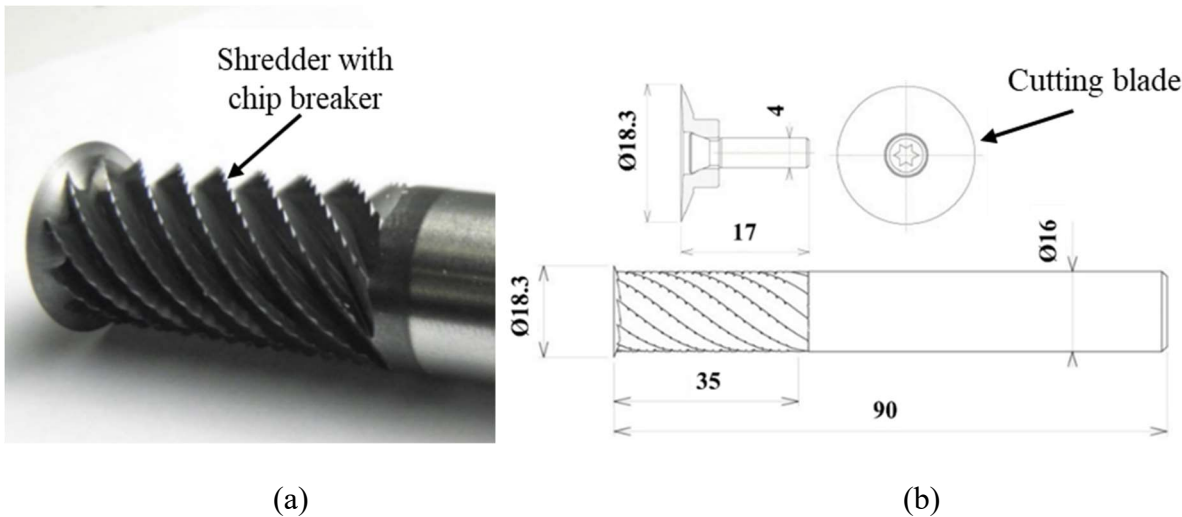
Milling tool designed by Evatec tools® company with reference NACNA 011 used for Nomex® honeycomb structures. (a)- Combined milling cutter. (b)- The ‘Shredder’ part with chip breaker made of high-speed steel and tungsten carbide cutting blade.
